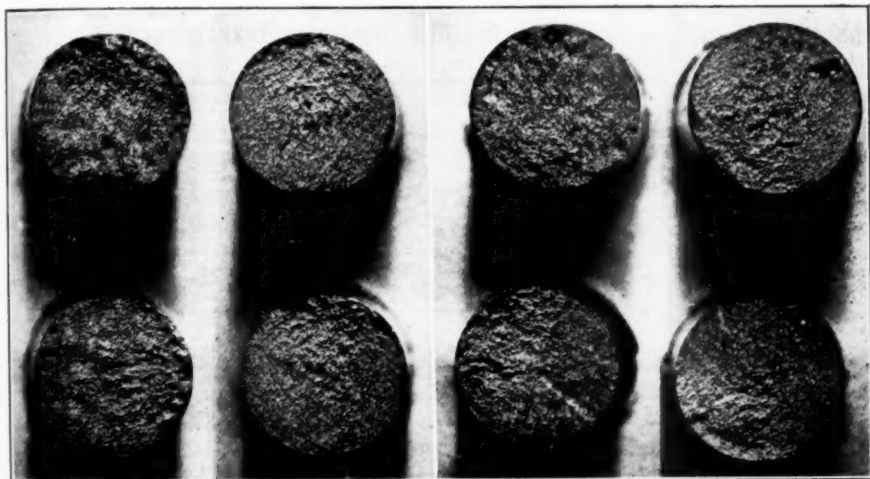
Fatigue Fractures Obtained in Sound Metal.
